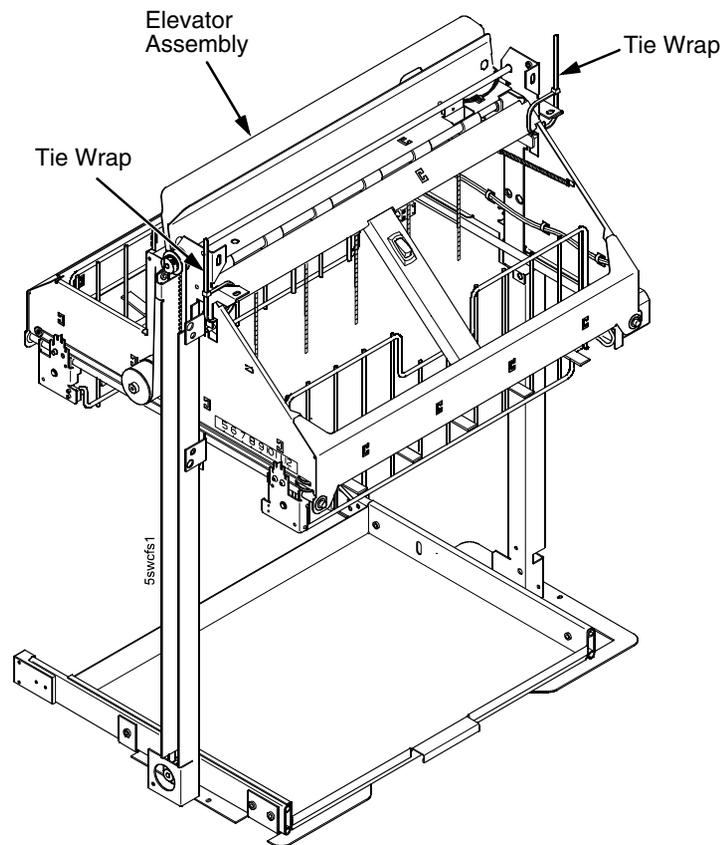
This figure shows how to tie the elevator assembly preparatory to removing the constant force spring.
